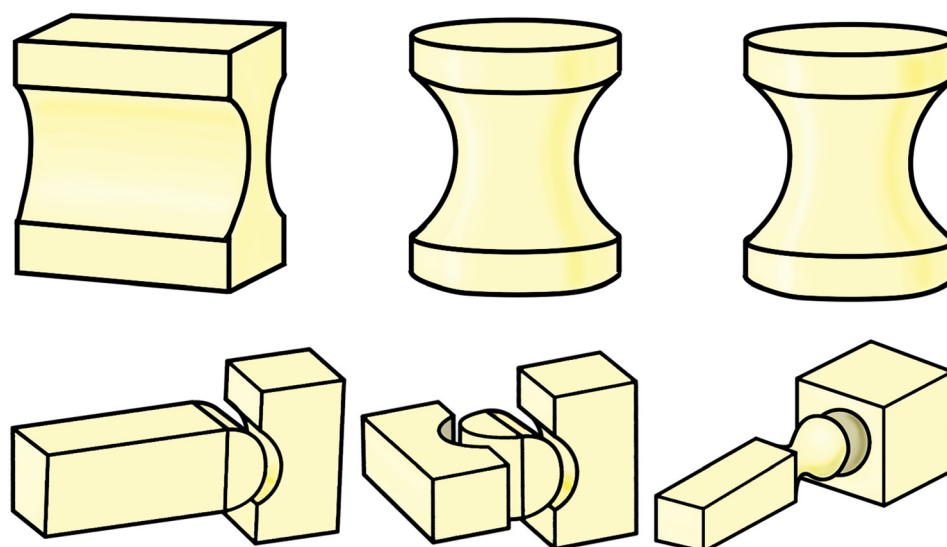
Fundamental joint design. Top left: one-piece (compliant) planar joint. Top Middle: one-piece (compliant) universal joint. Top right: one-piece (compliant) spherical joint. Bottom left: multi-piece planar joint. Bottom middle: multi-piece universal joint. Bottom right: multi-piece spherical joint.
